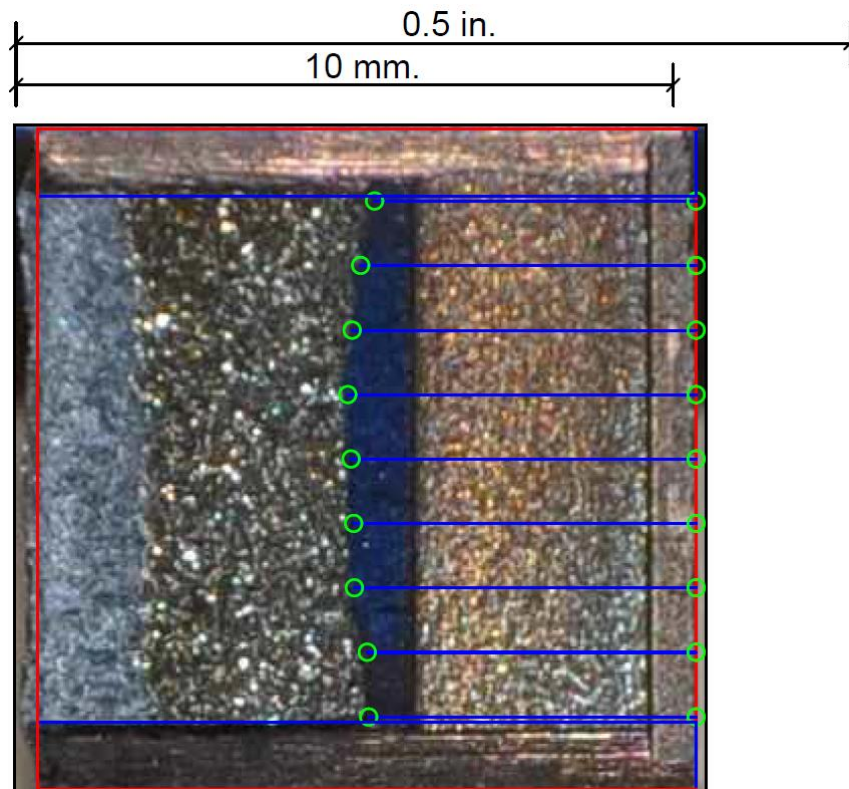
Specimen B7' Fracture Surface
